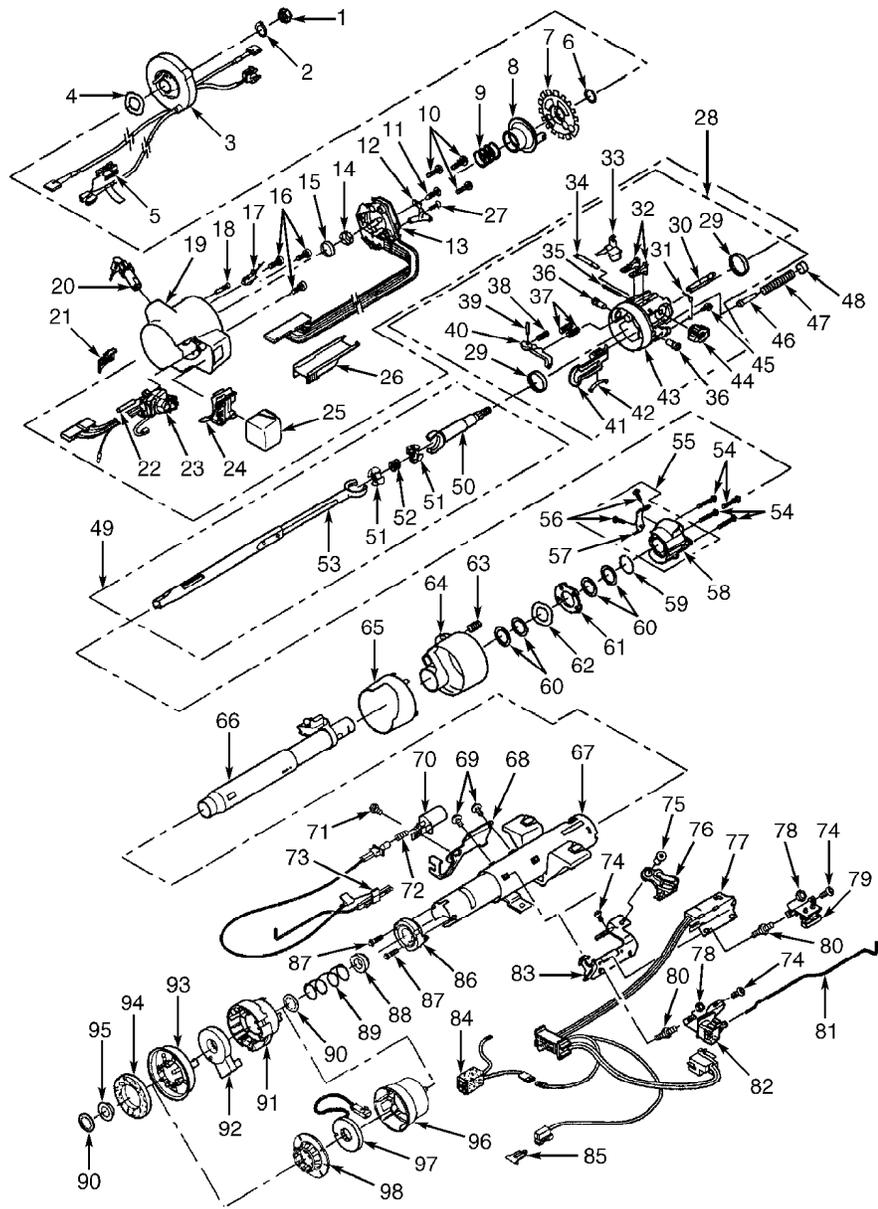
Exploded View Of Steering Column Assembly ("C" Body - Column Shift)
